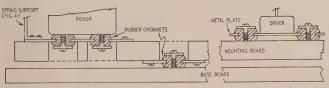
Cross-sectional view shows method of shock-mounting echo unit.
